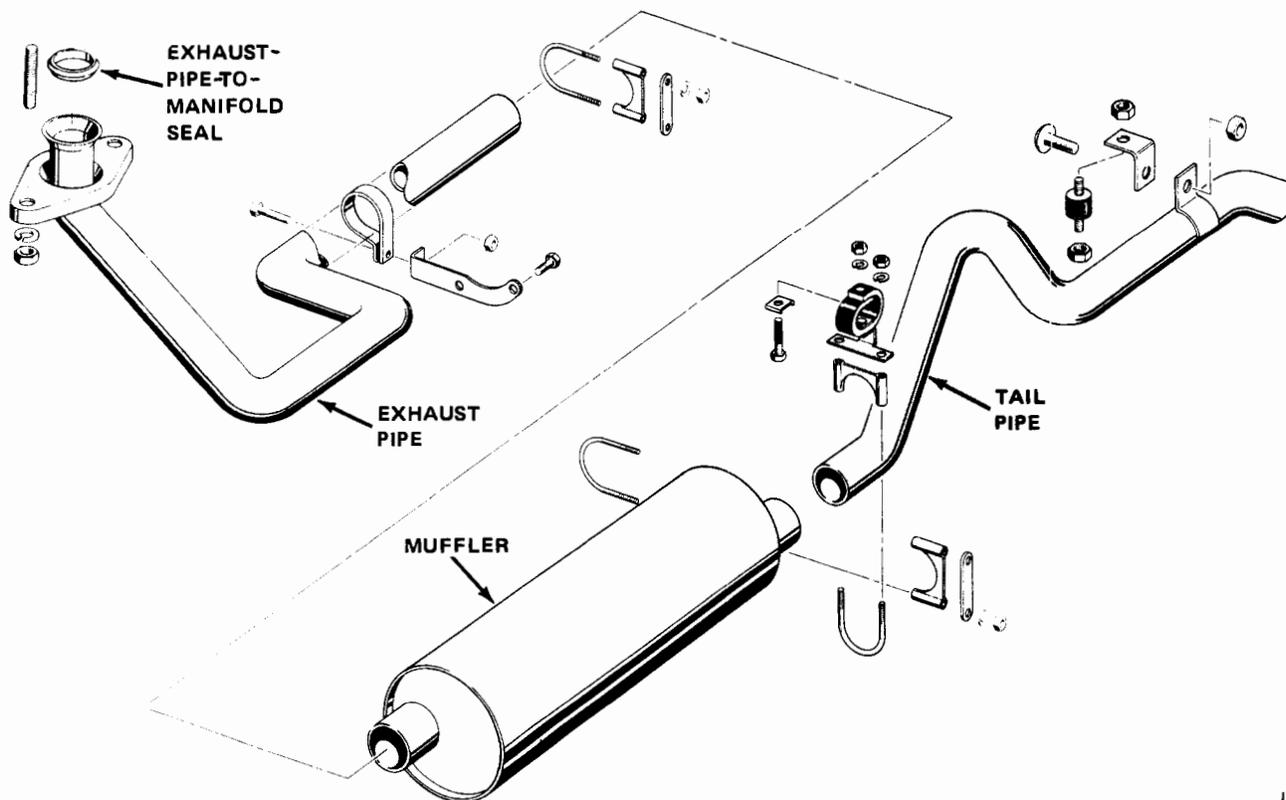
A-41 Exhaust System—CJ-5/CJ-7—Six-Cylinder Engine
